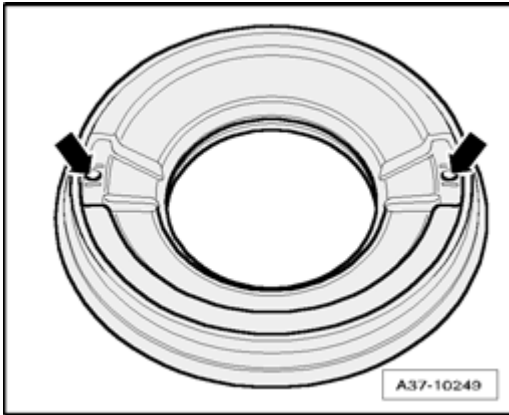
Checking Freedom Of Movement Of Valve Ball In Piston "C"
